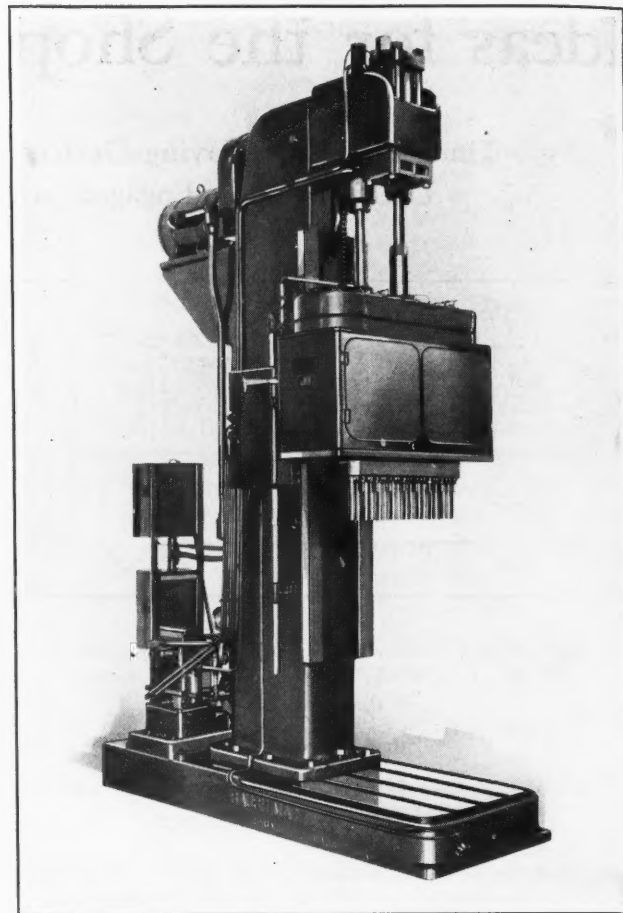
One of Five Similar Machines Equipped for Drilling, Boring, and Reaming Operations on Cylinder Blocks
